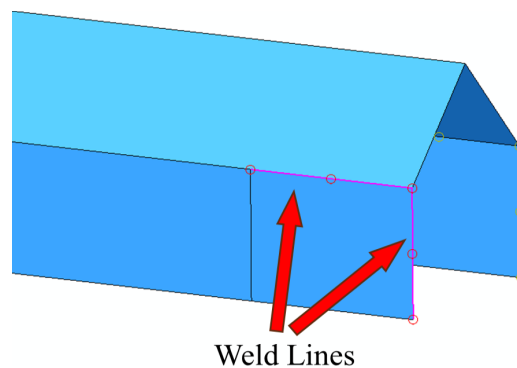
Weld line tie connections for open section welds shown on a crimped angle web
